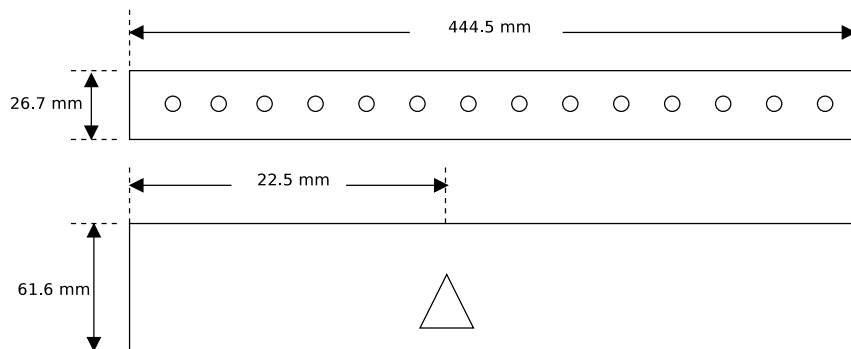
Schematic plan and side view of test sample with fuel hole cut-out
